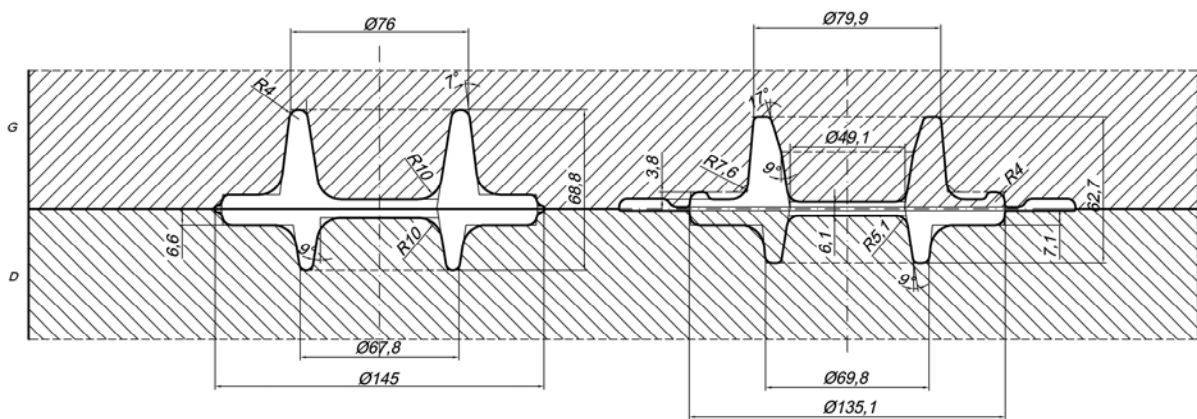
Cavities of preforming and final forging dies for wheel hub
